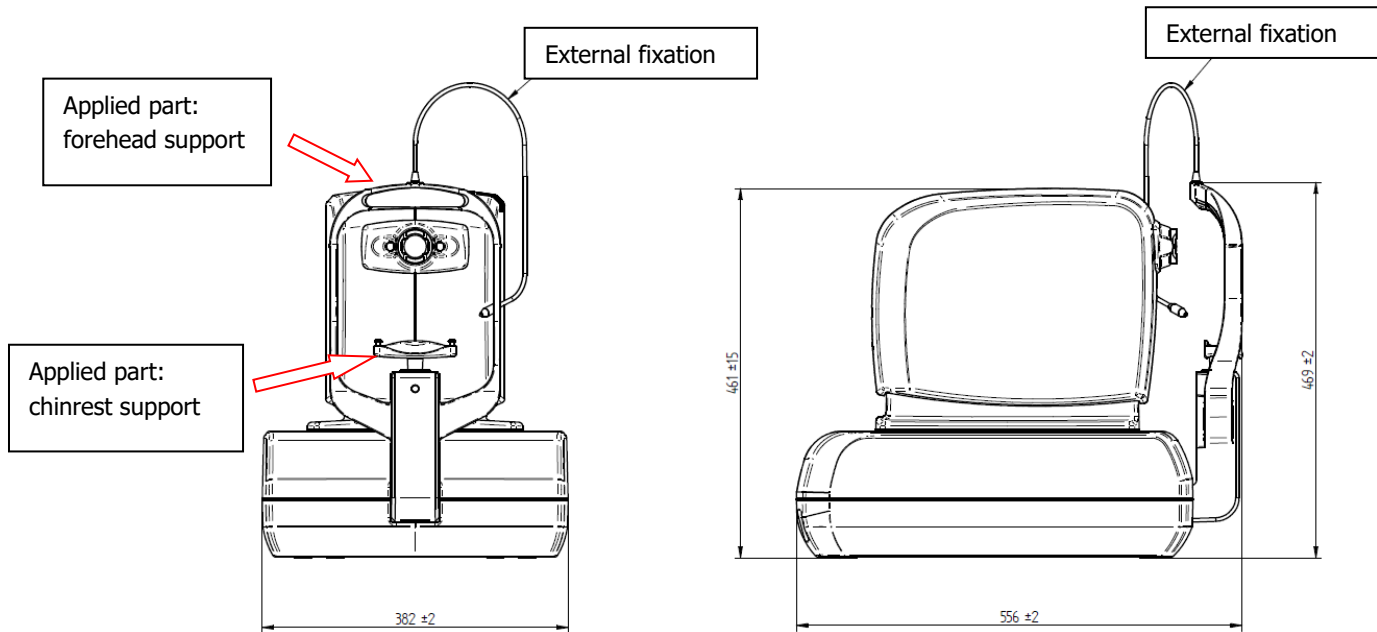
The chassis (front and side), applied parts and external fixation of the REVO
